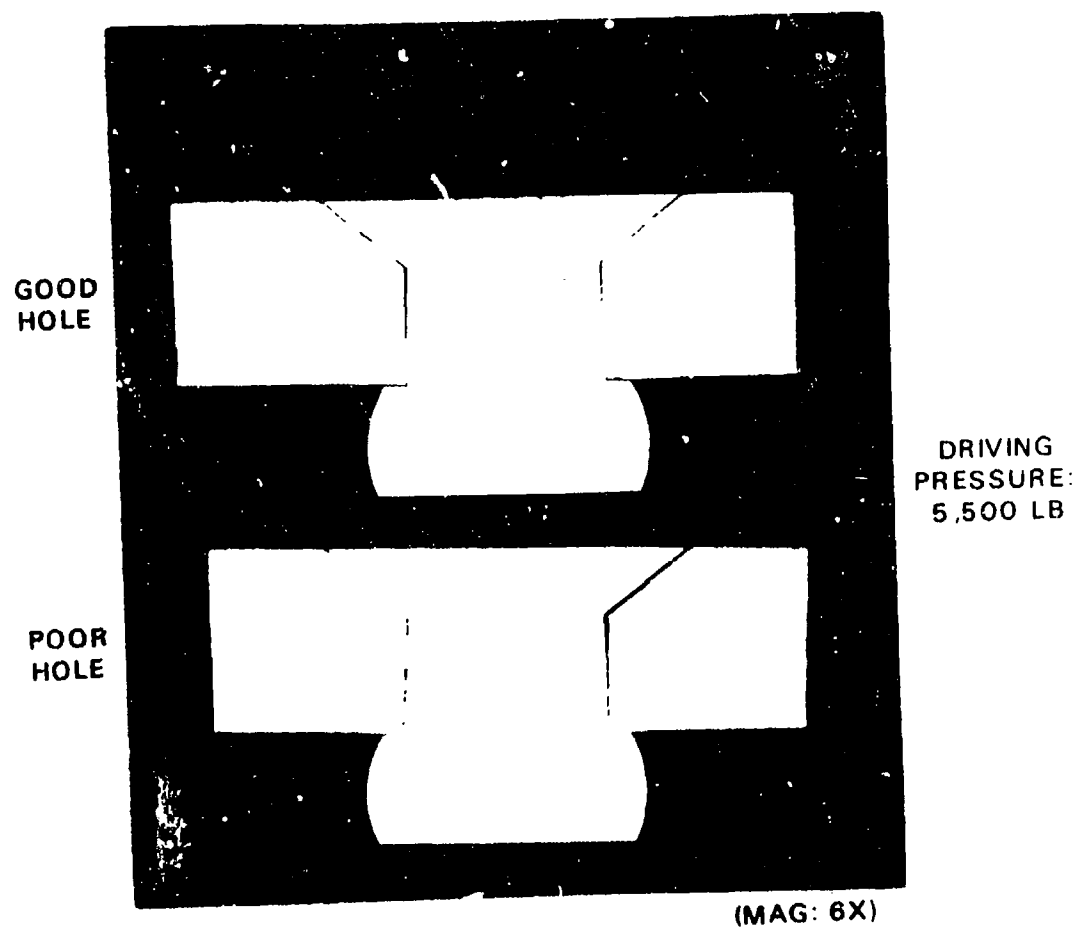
Photomicrographs of Sectioned 3/16-in. Dia. 7050-T7X Rivets
